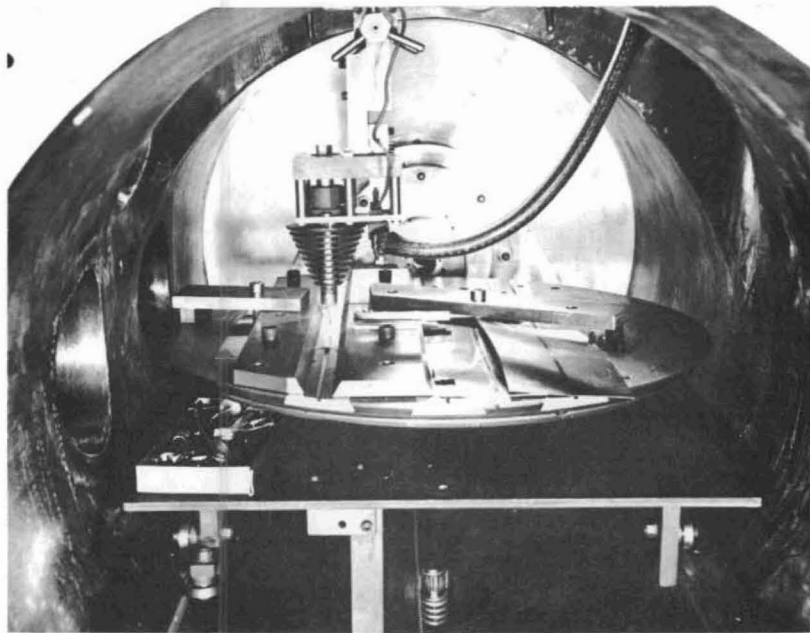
End view of heat-sink torch and clamping fixtures and back-up plates on welding table.
